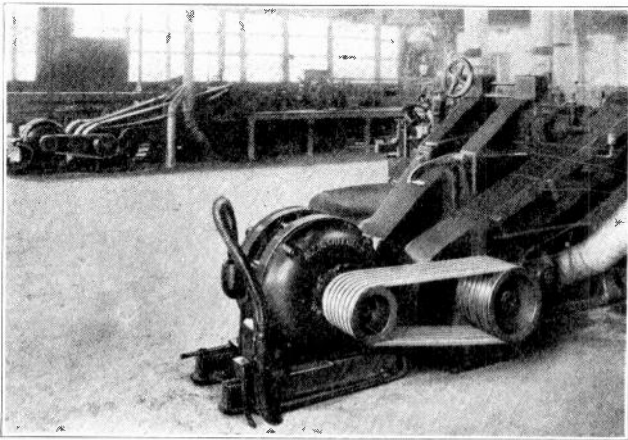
An A. C. induction motor in use for driving a woodworking machine. The motor is connected to the machine by means of a special rope drive. (Photo courtesy Allis-Chalmers Mfg. Co.)
